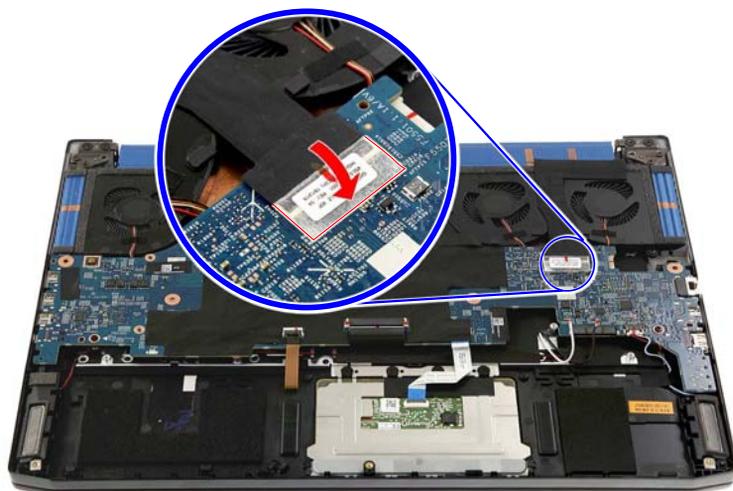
eDP Cable Self-Adhesive Tape
